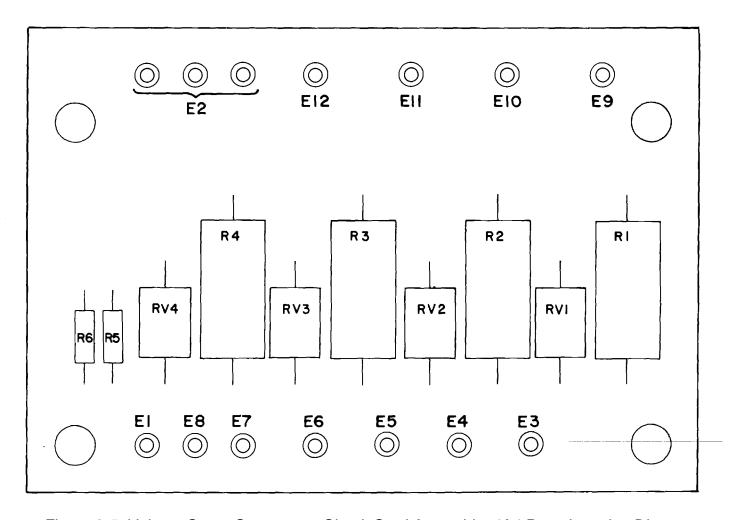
Voltage Surge Suppressor Circuit Card Assembly, 4A4 Parts Location Diagram
